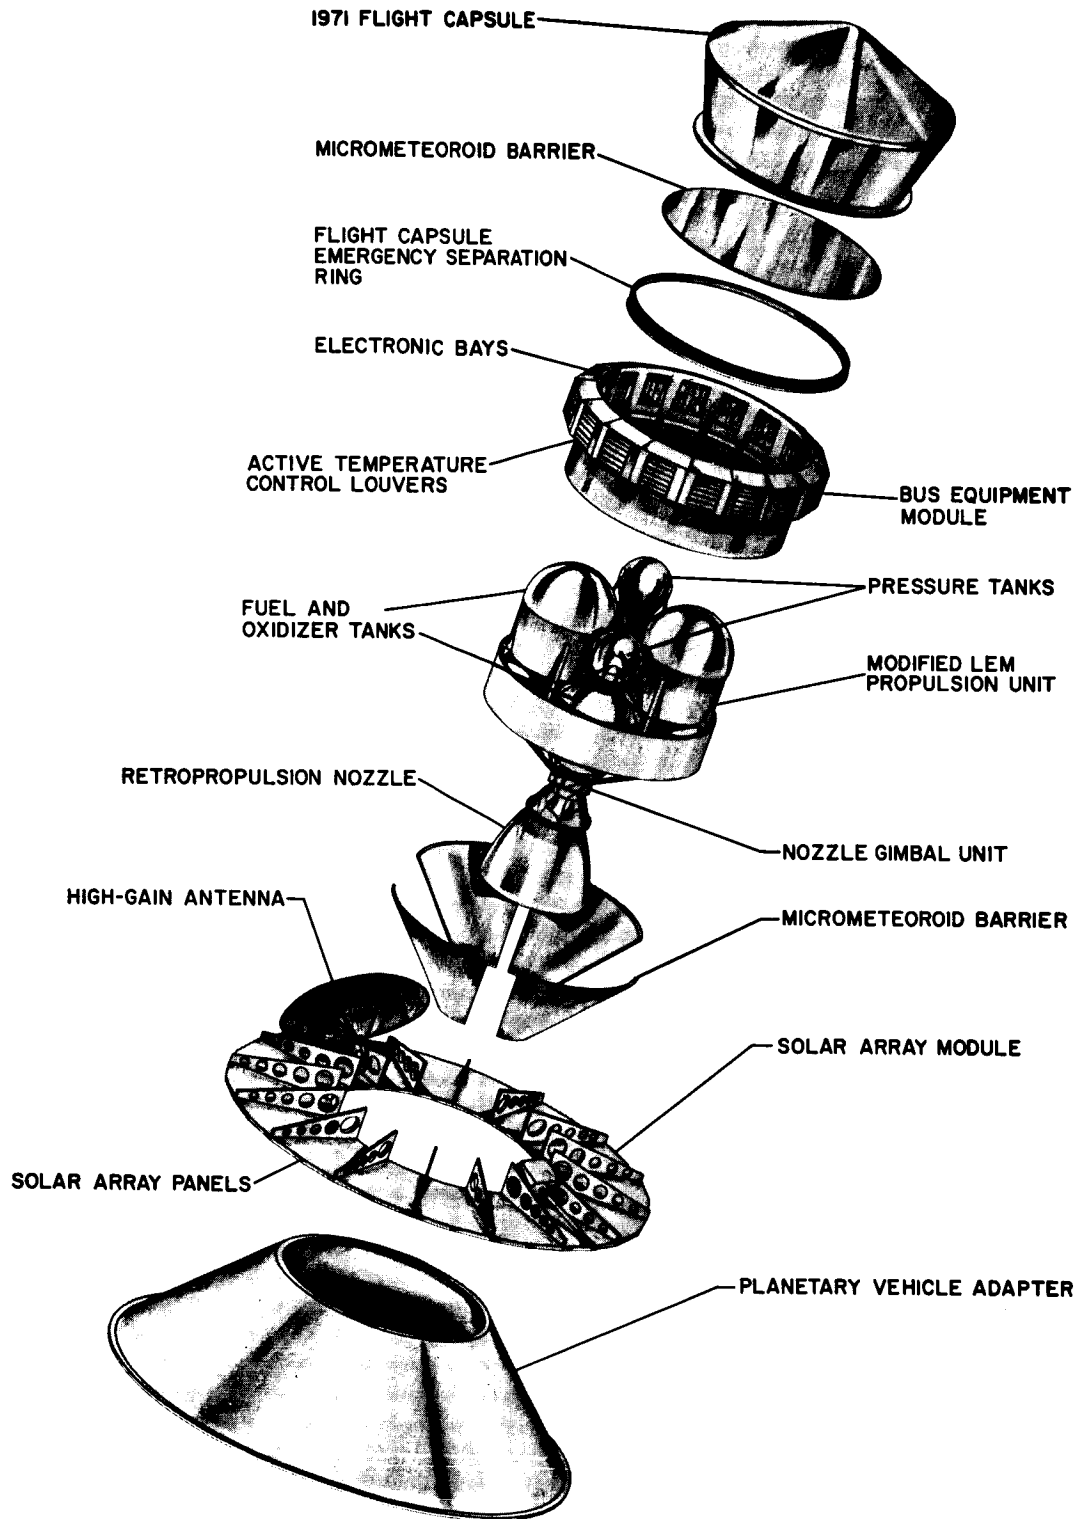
Modified LEMDE Configuration, Exploded View
